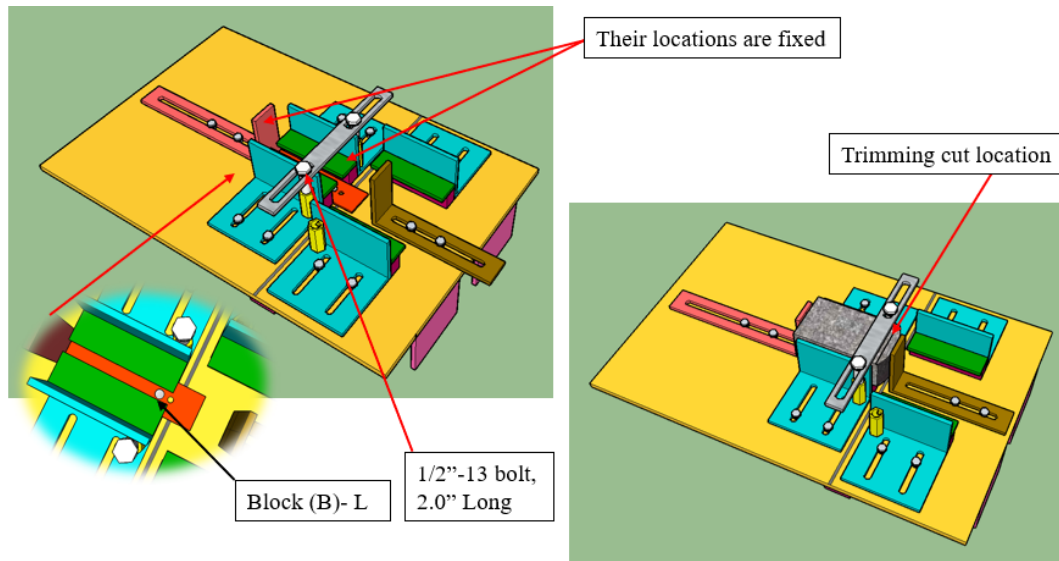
Illustration drawings to the fourth trimming of RH specimens.
